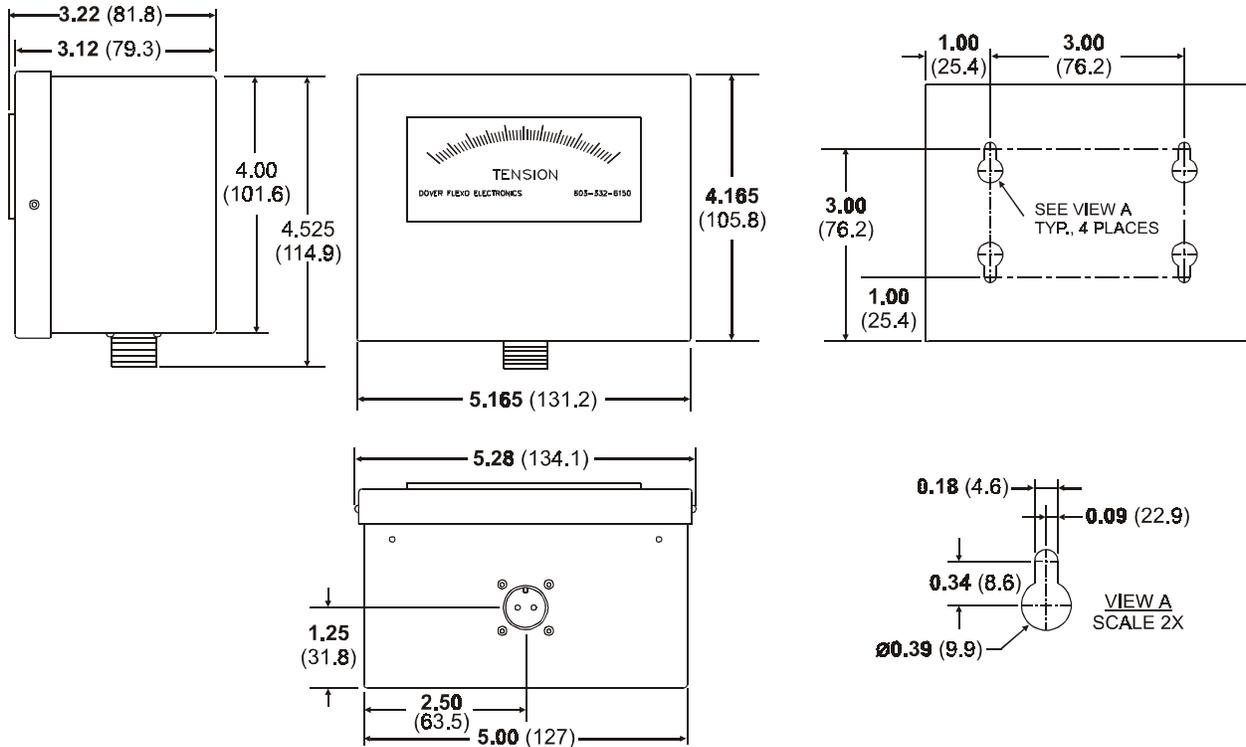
REMOTE METER ENCLOSURE DIMENSIONS
